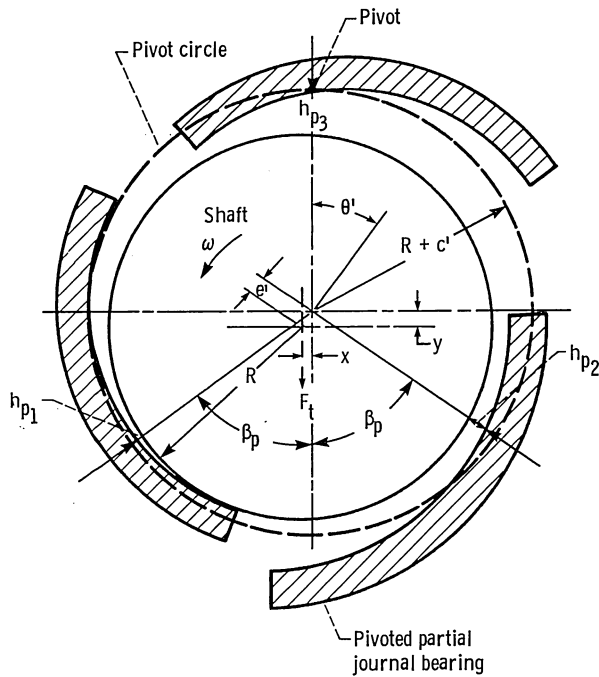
Geometry of pivoted-pad journal bearing with three shoes. (From Gunter et al., 1964.)
